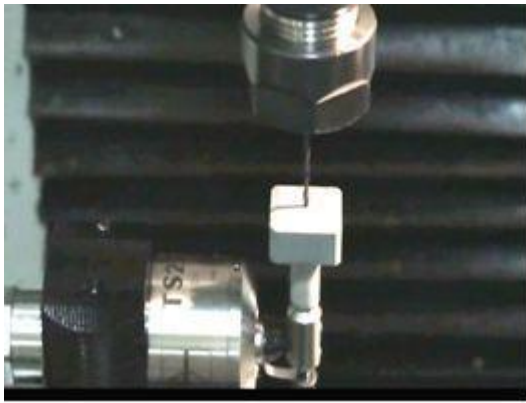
Drill no. 1 measurement using the TS27R instrument
